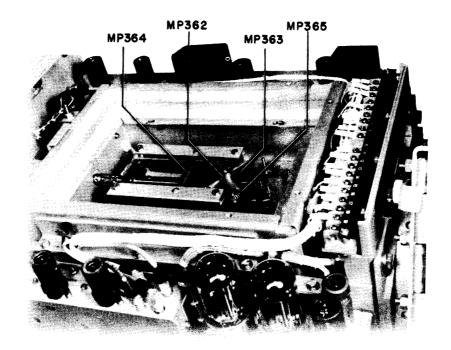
A. Radio Frequency Oscillator O-581/WRT-2, Master Oscillator Oven Gear Train, Location of Parts, Sets Serials 107 and up
